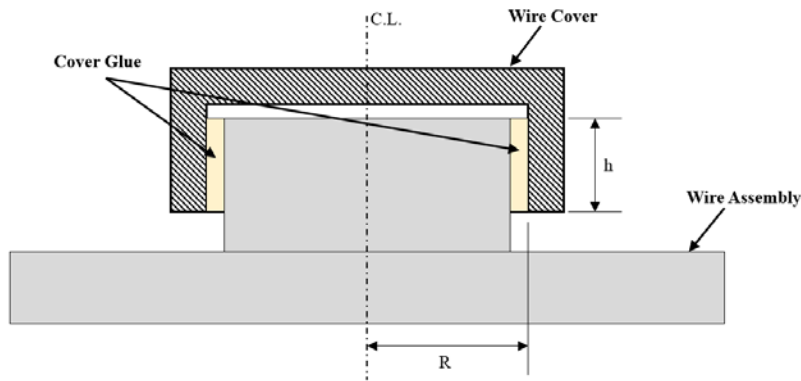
Illustration of assumed cross-sectional view of the glued wire cover and wire assembly.
